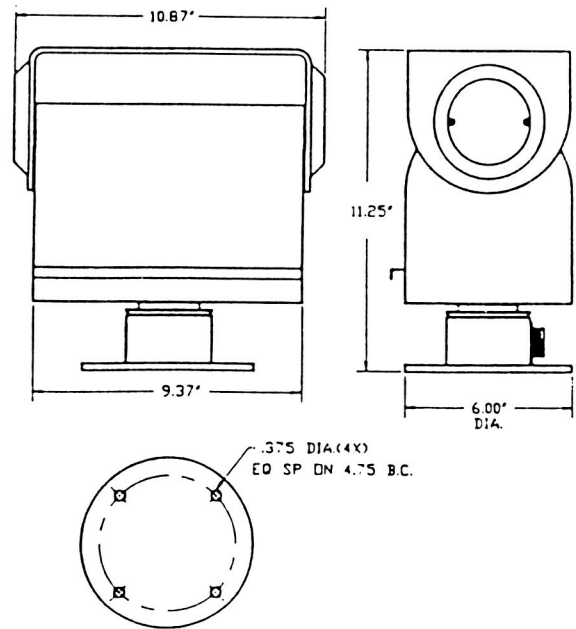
STAR Pan/Tilt Unit, Front, Side and Bottom Views
